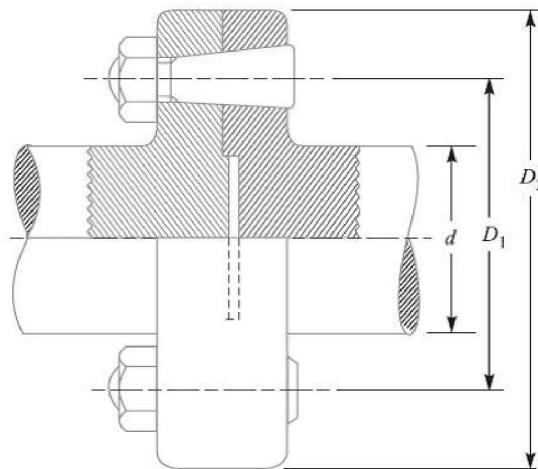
Solid Flange Coupling or Marine Type flange coupling.
